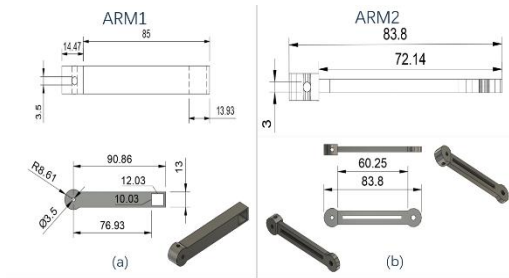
CAD Design of Robotic Arm Components (all dimensions in mm)
